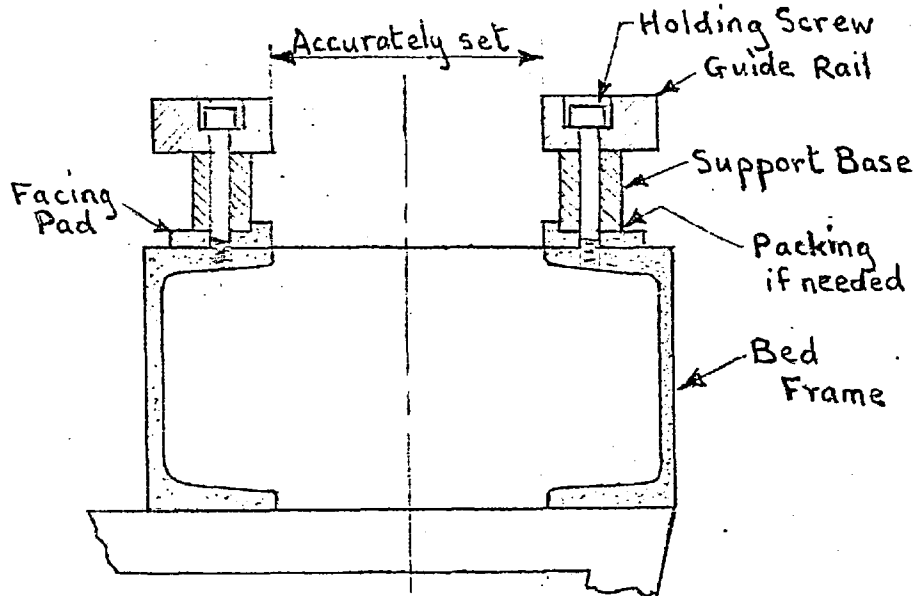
System for obtaining accurately true guide rails with limited machining facilities.
